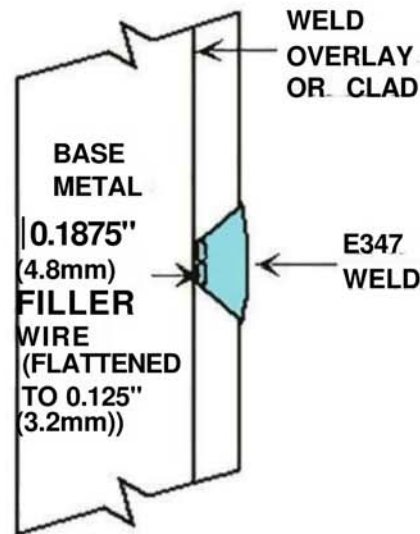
Protecting the Exposed Cr-Mo Steel from Sulfidation by Filling the Groove with SS Welding Wire and Welding Over It with an SS Consumable While Avoiding Welding on the Cr-Mo Steel
